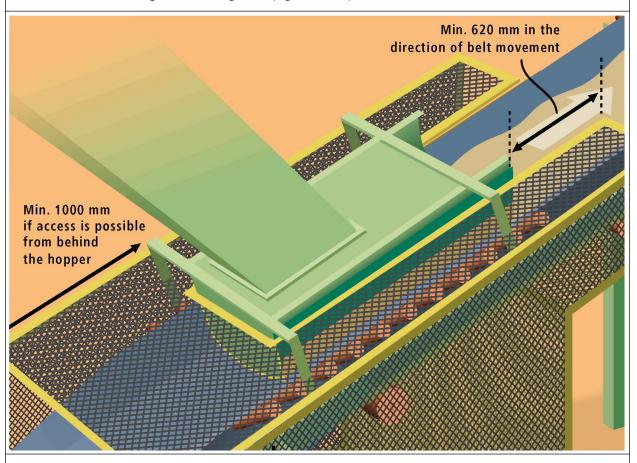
SURROUNDING FIXED GUARD IN LOADING AREA
